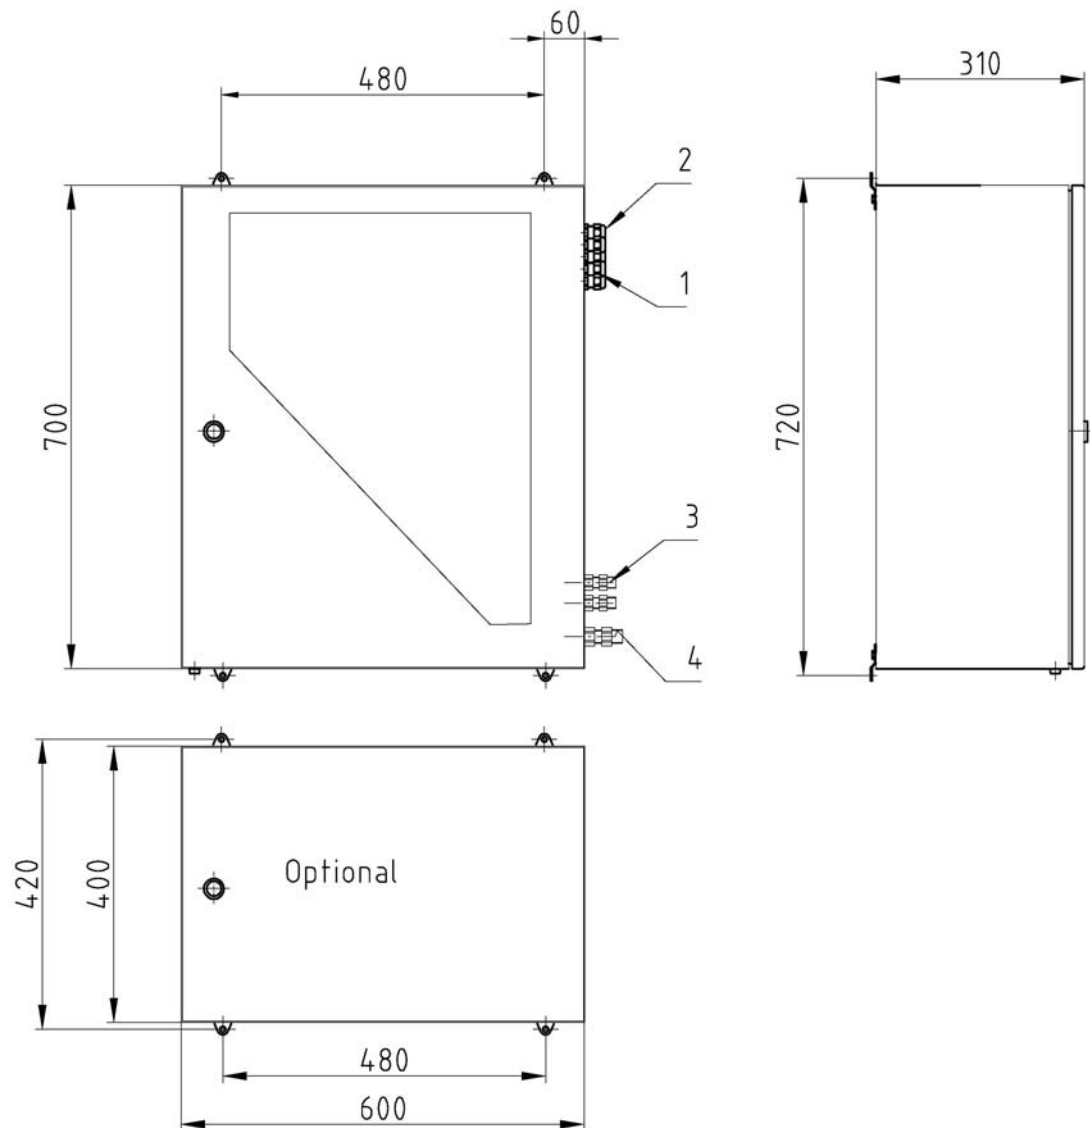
Dimensional drawing of the PowerMon and the reagent cabinet
